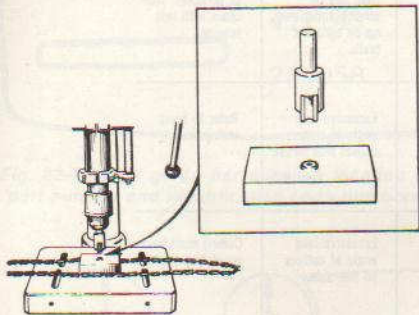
Rivets should be installed using the special Pioneer rivet spinning attachment.
